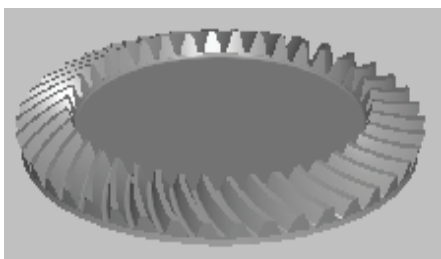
Tooth profile of gear modeled using 3-D CAD system
